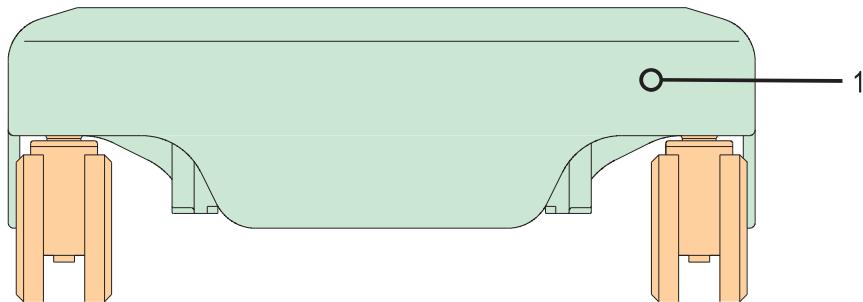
Base Platform, 2 Swivel Caster with Brake, Front View
